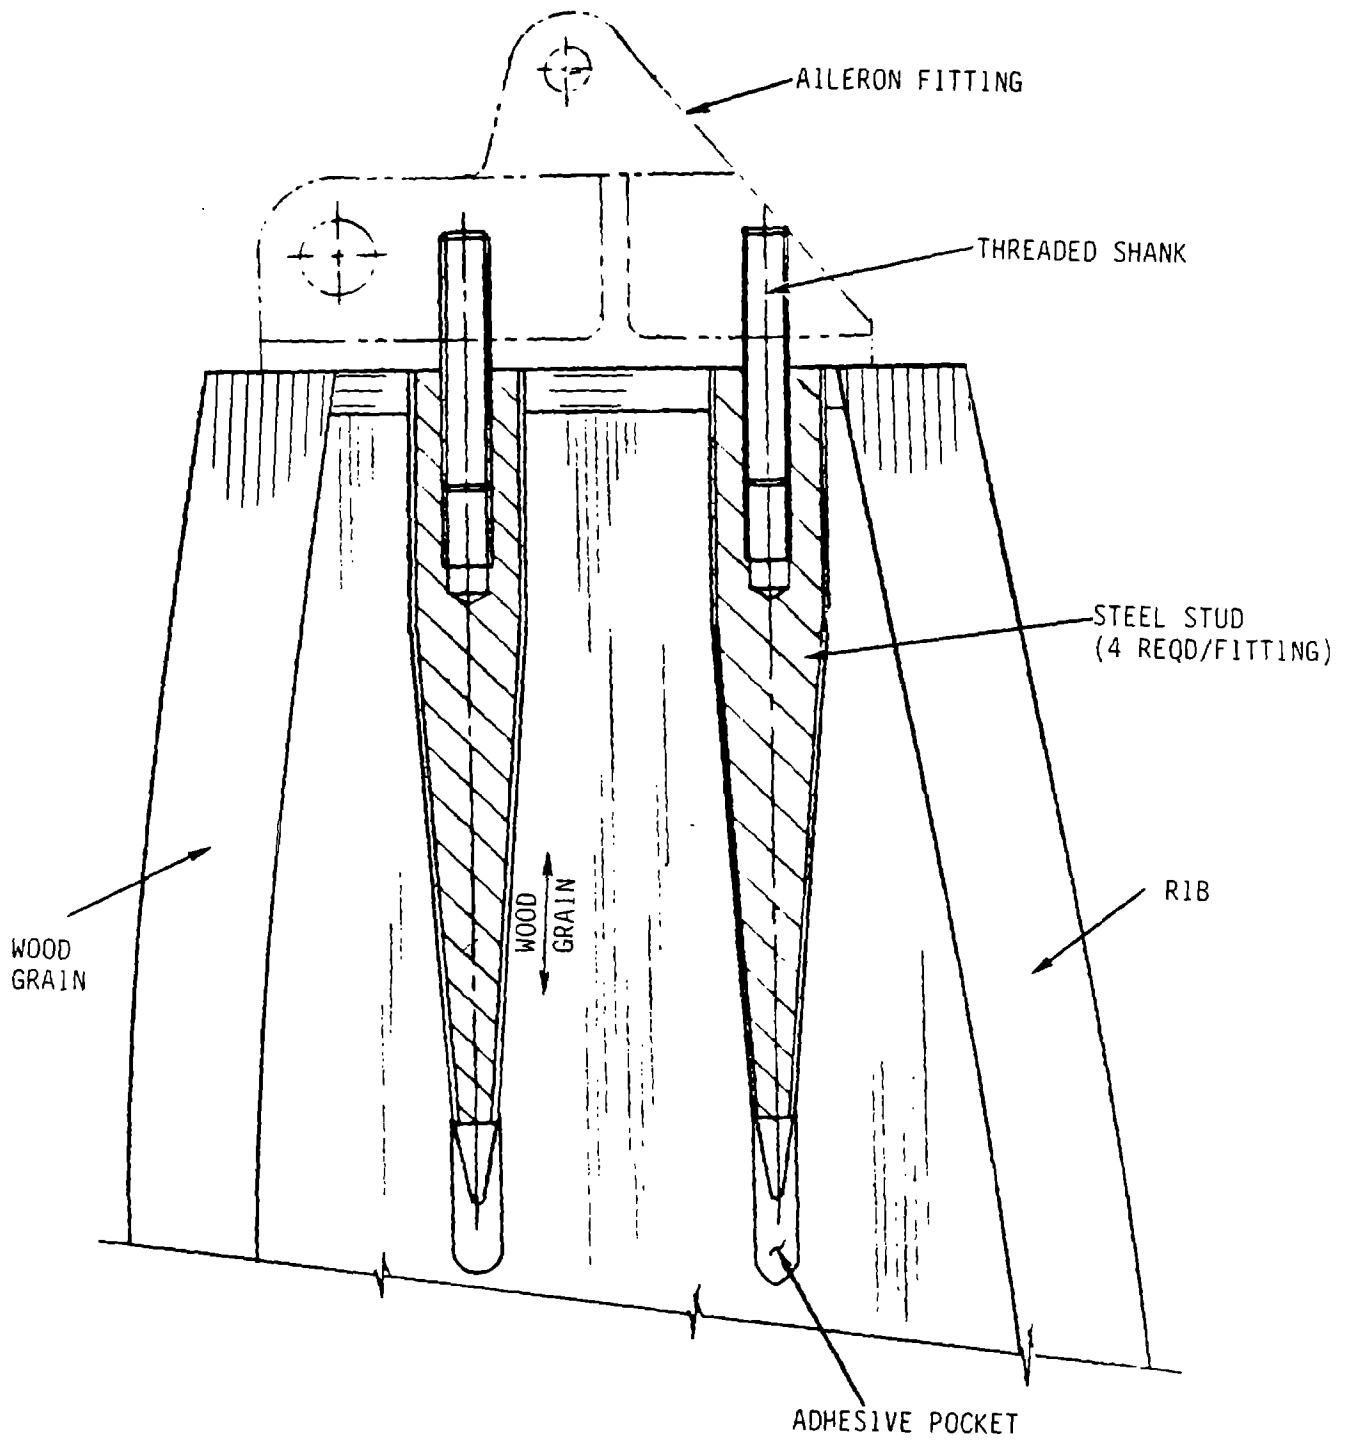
Attachment of Aileron Fitting to Outer Blade Section
